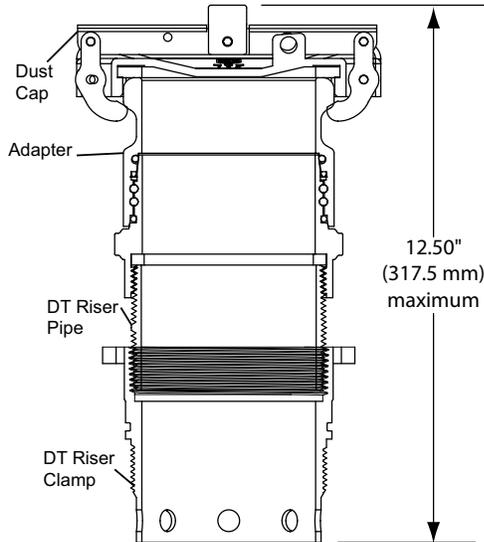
Drop Tube (DT) Riser Clamp Assembly Dimensions
